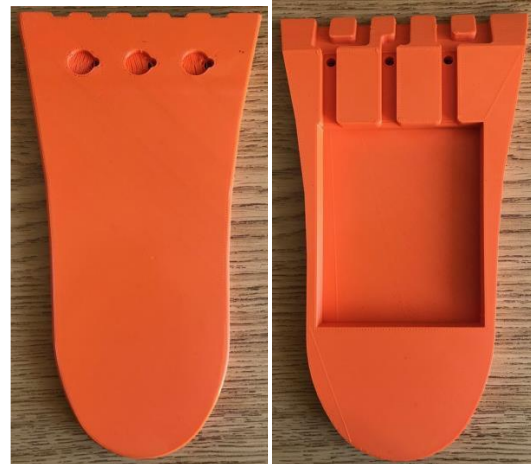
Top View (left) and Bottom View (right) of 3D Printed Insole
